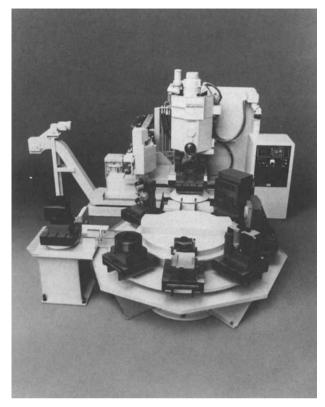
A machining centre (horizontal) with rotary pallet changer. [Courtesy of Cincinnati Milacron.]
